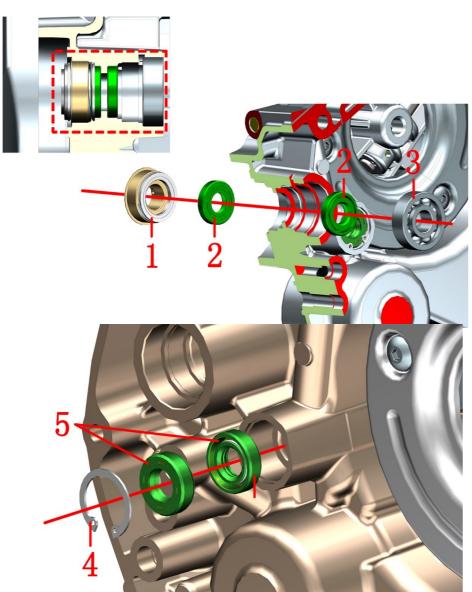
RIGHT CRANKCASE COVER ASSEMBLY		Disassembling the water pump assembly-3	СНК
